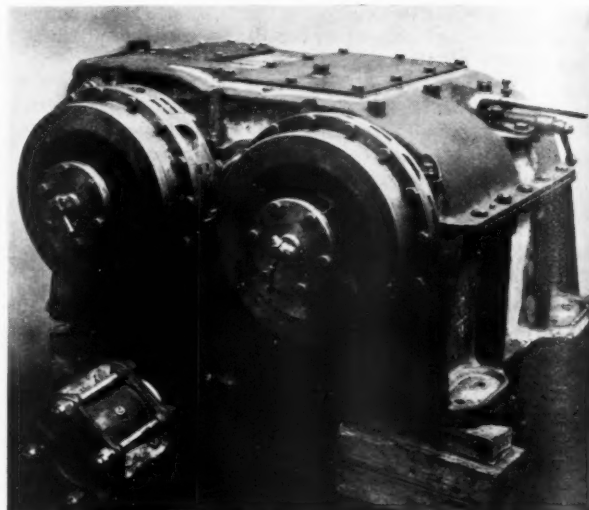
T.A.G. four-speed gearbox with double-end drive. The box is bolted to the bogie frame structure through the intermediary of rubber blocks
